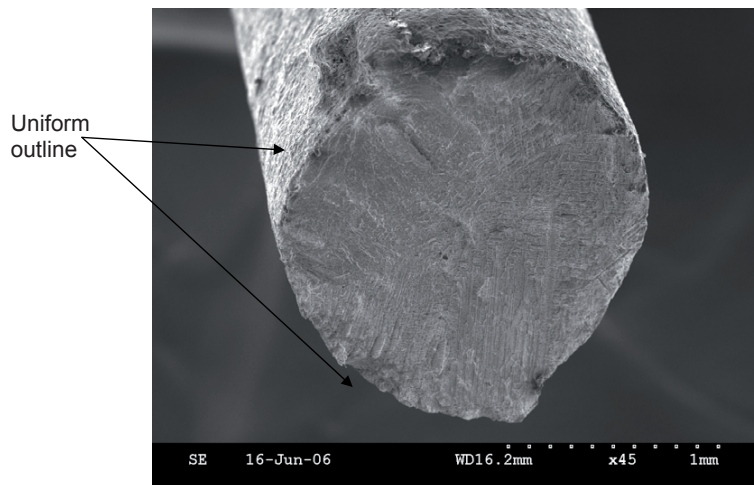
Fractured control specimen. (Mag. of x45) N.B. the uniform outline of the specimen and fracture planes of the dendrites.
